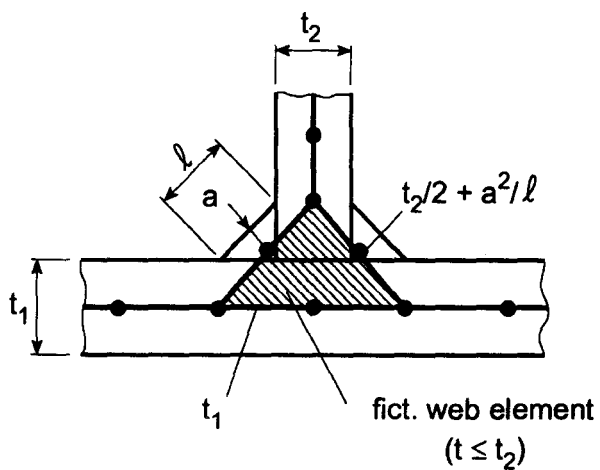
Modeling of a Fillet Weld with Plate Elements
